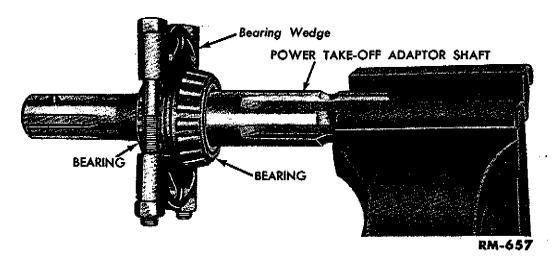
Separating Power Take-off Adapter Shaft Bearings
